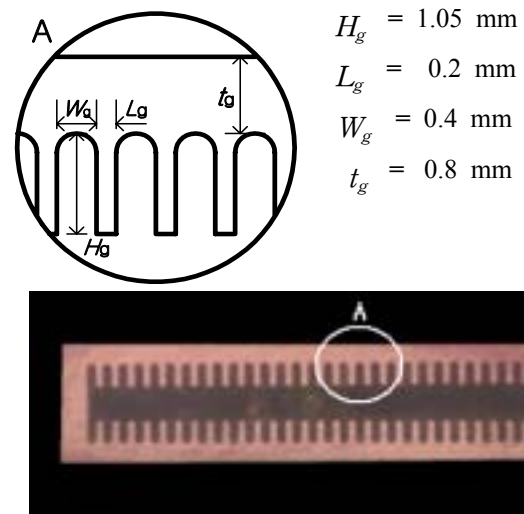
Cross-section of the flat-strip heat pipe and groove shape
